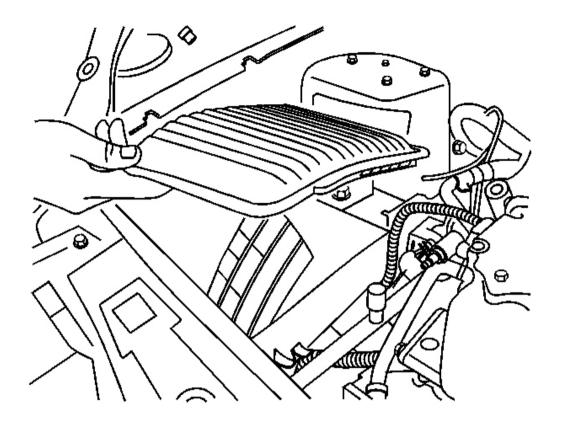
View Of Air Filter Assembly Courtesy of GENERAL MOTORS CORP.
